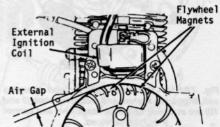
On engines with ignition coll mounted outside of flywheel, air gap between coil laminations and flywheel magnets should be set to 0.005-0.008 Inch (0.13-0.20 mm).
